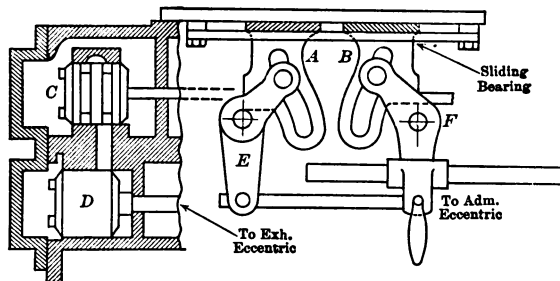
CAM WRIST PLATES OPERATING "FITCHBURG" VALVE
